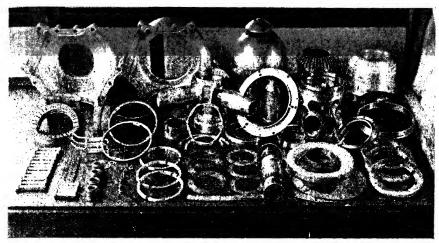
Complete component parts of hydromatic airscrew except blades
